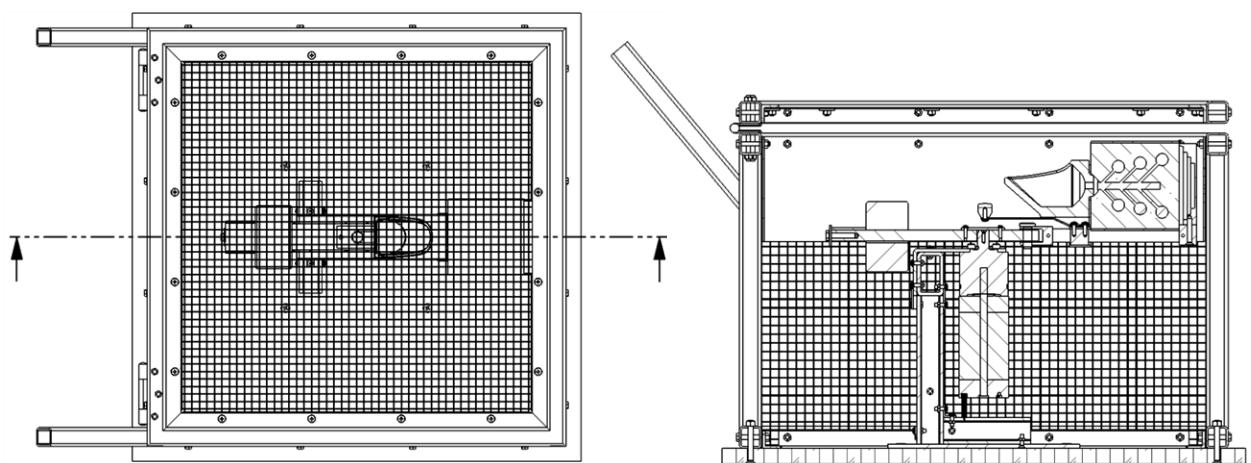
Top and right section view of full assembly of entire centrifugal casting machine, shown with crucible and flask assembly
